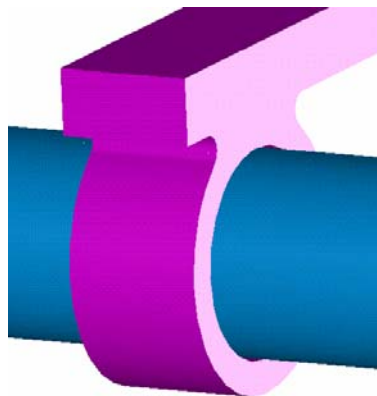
Cylindrical Rod and Sliding Pad Configuration
